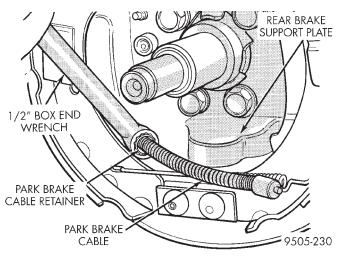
Park Brake Cable Removal From Brake Support Plate
